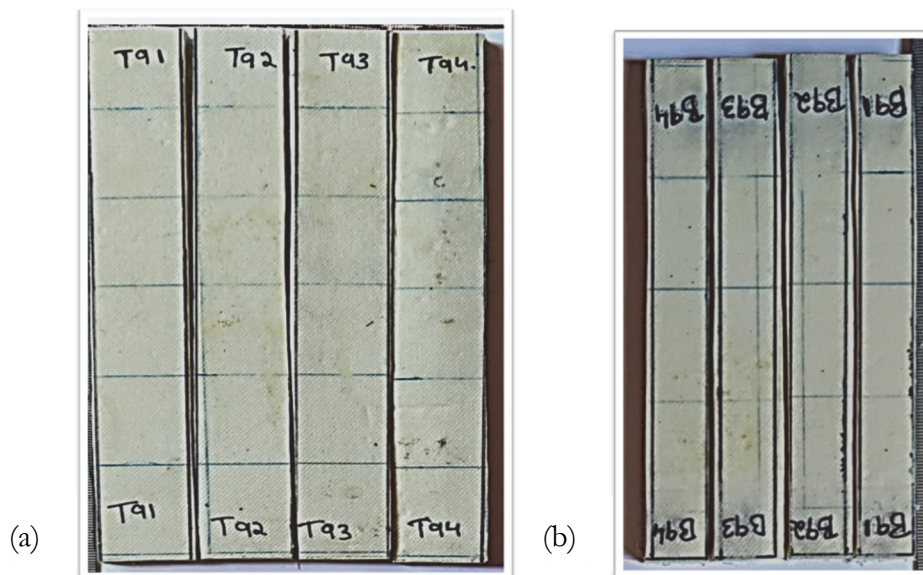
(a) Tensile test specimens (b) Flexural test specimens.
